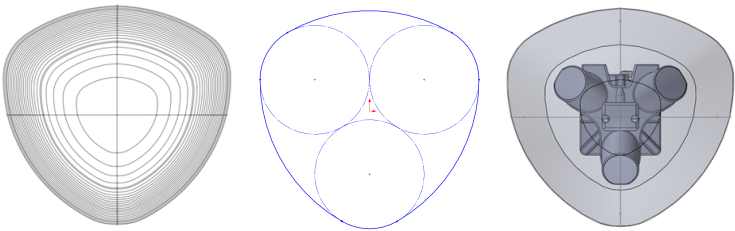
Left image: Cross-section view of the fuselage. Middle image: Cross-section shape of the fuselage. Right image: Cross-section view of the fuselage with the MAD-XR sensor included
